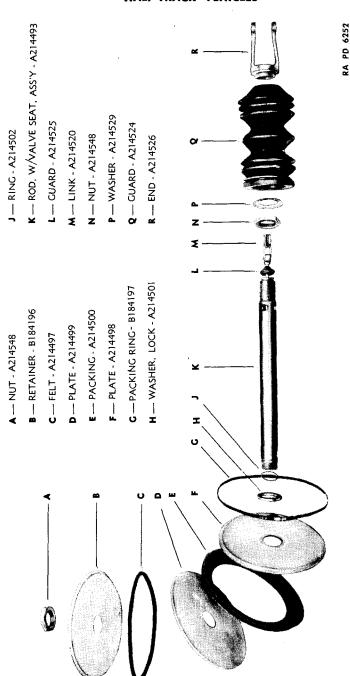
Vacuum Booster Piston and Rod Assembly—Exploded
